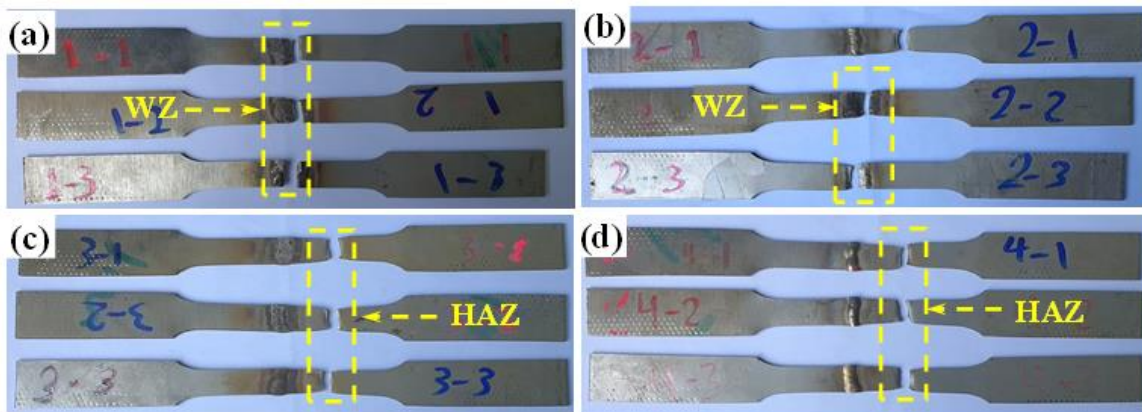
Fractured tensile test specimens for stainless steels 304 and 304L welded joints at (a) ER309 and 70 A (b) ER309 and 80 A (c) ER304 and 70 A (d) ER304 and 80 A
